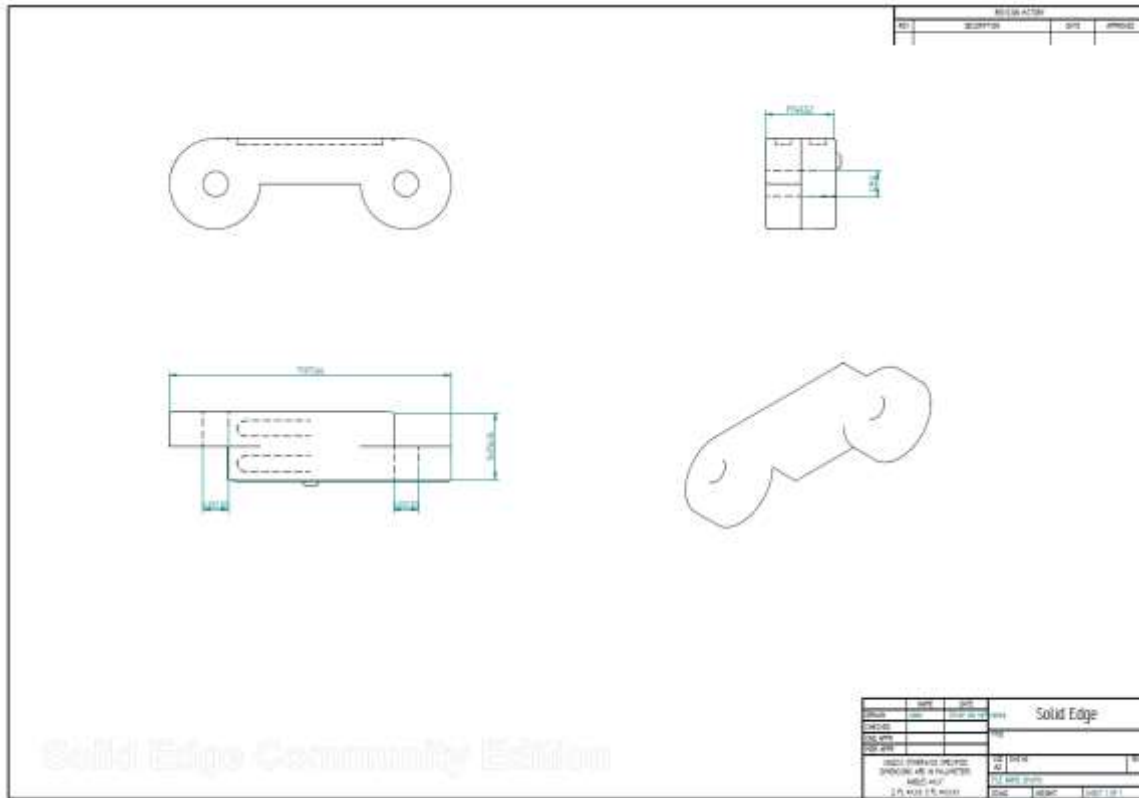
Mechanical drawing of the 3D-printed mould by Solid Edge
